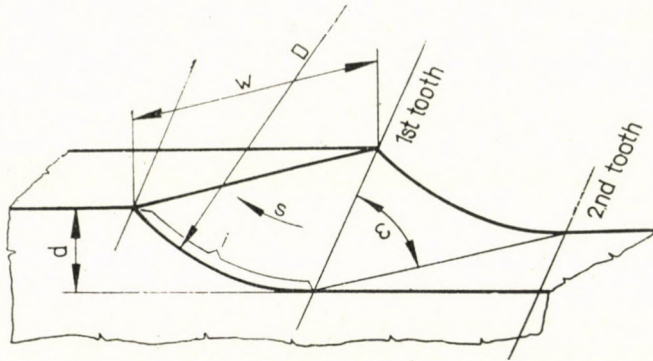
The conditions of cutting at milling cutter with a small inclination angle
